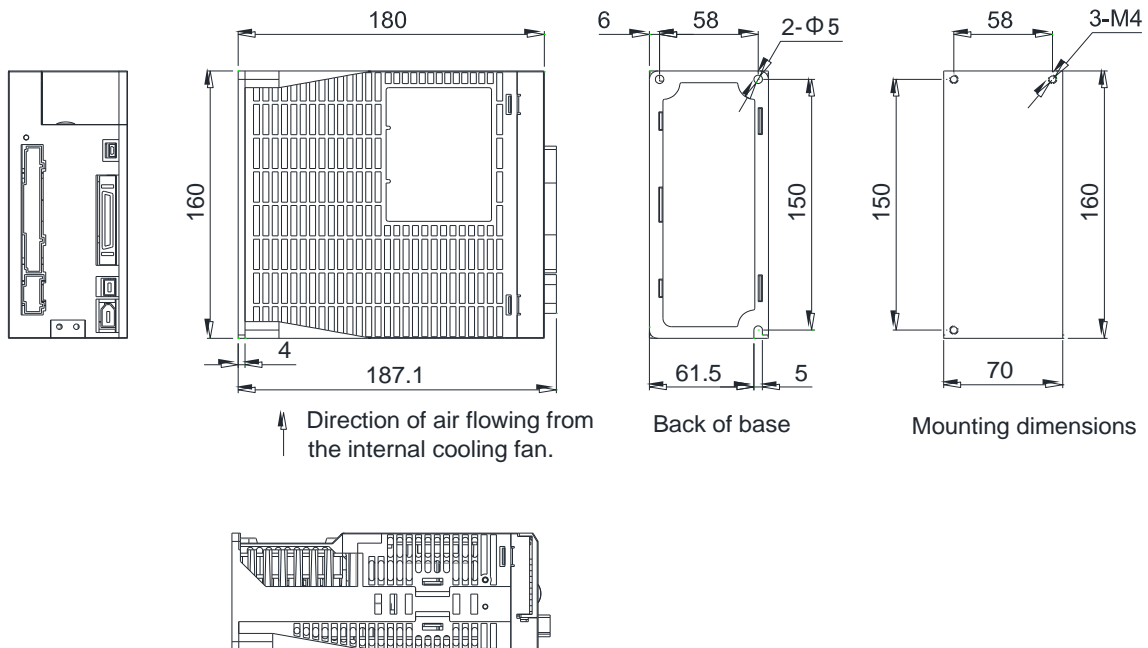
Outline dimensional drawing of WSDV-5R0 and WSDV-6R8
